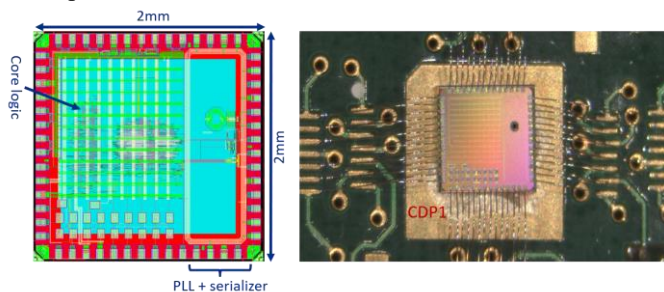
CDP1 layout and its wire bonding on the daughter board
